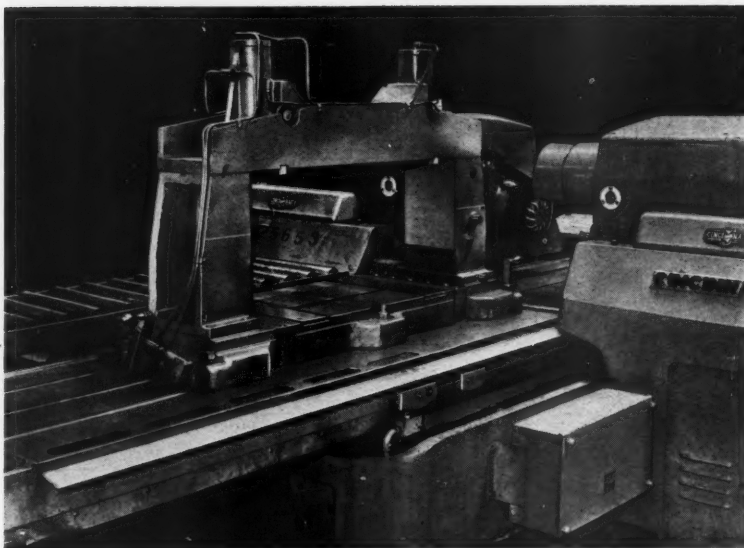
The work-holding fixture in the loading position for the machine shown in Fig. 4.
